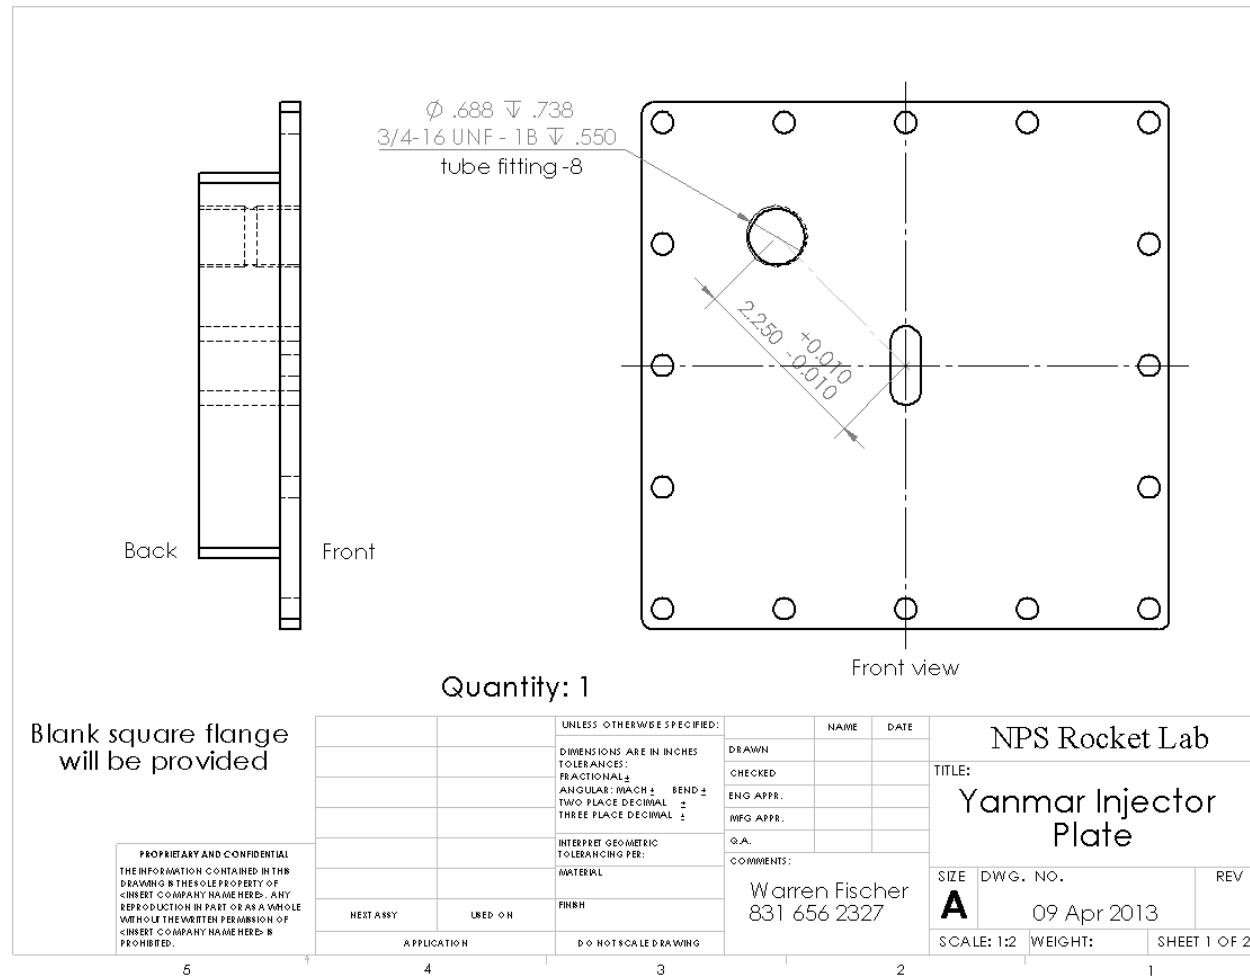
Yanmar Injector Adapter Plate Fabrication Drawing (View 1 of 2)
